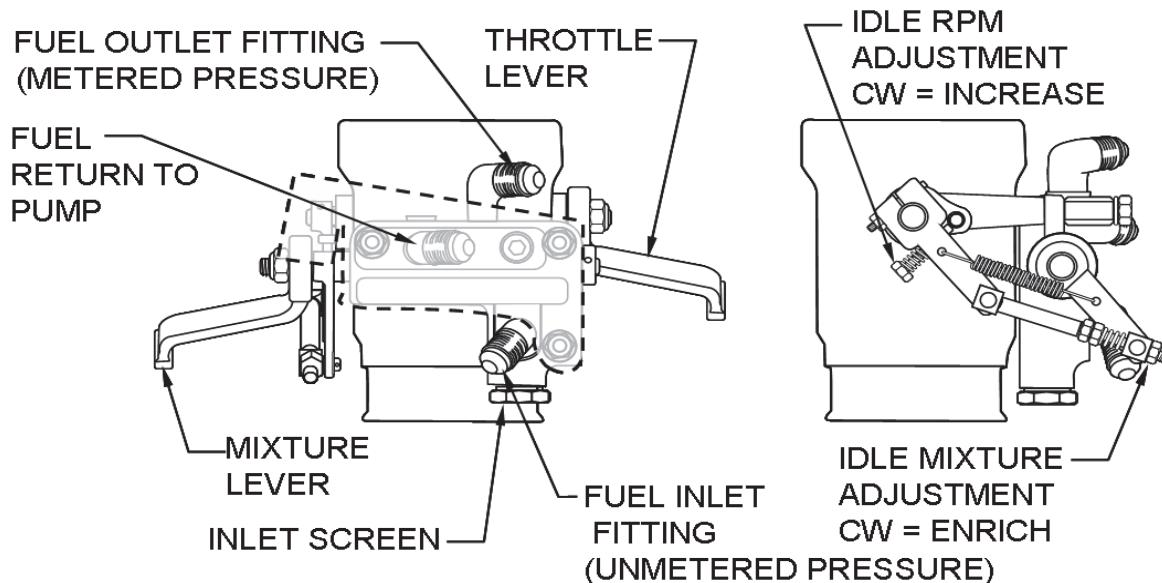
IO-550-A, B & C Throttle Body Adjustments
